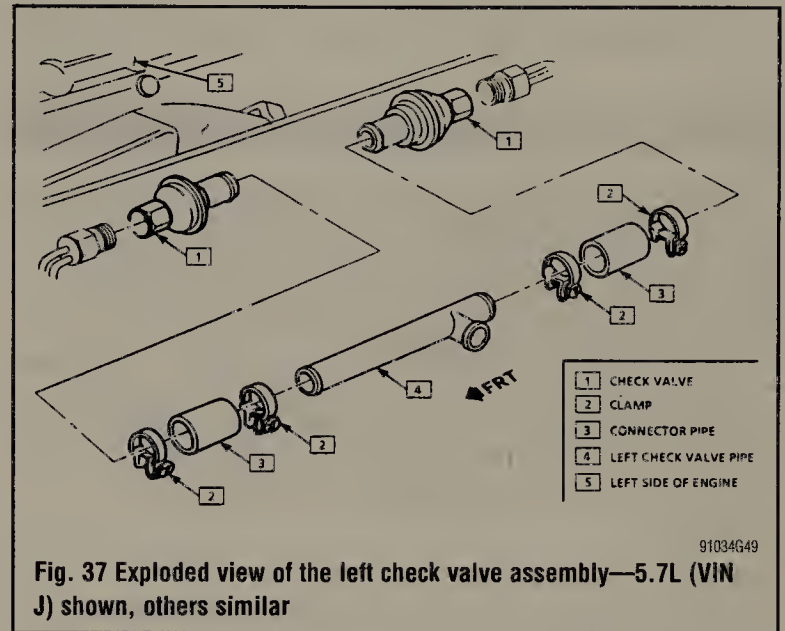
Exploded view of the left check valve assembly—5.7L (VIN J) shown, others similar
